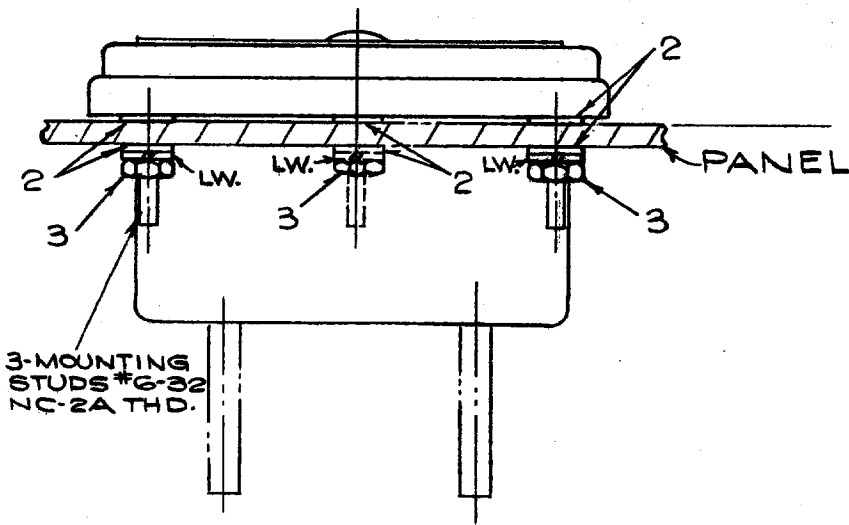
(381A128-0) Outline and Panel Drilling for Semi-flush Mounted Meter (Type D0-91)
